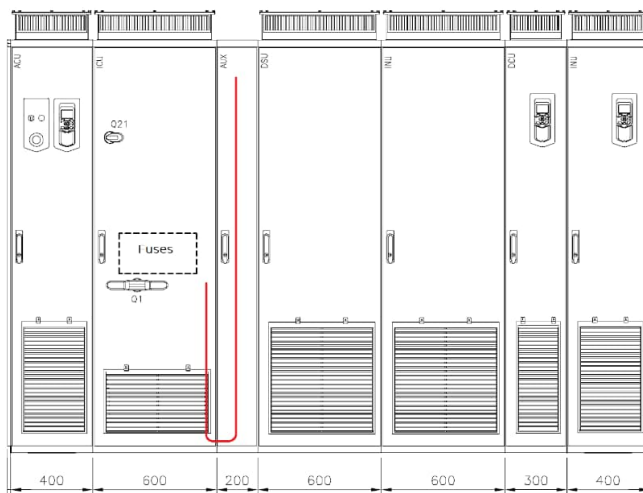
The dimensional drawing of the multidrive lineup. Top exit in 200 mm cabinet for 250 A output customer cables
